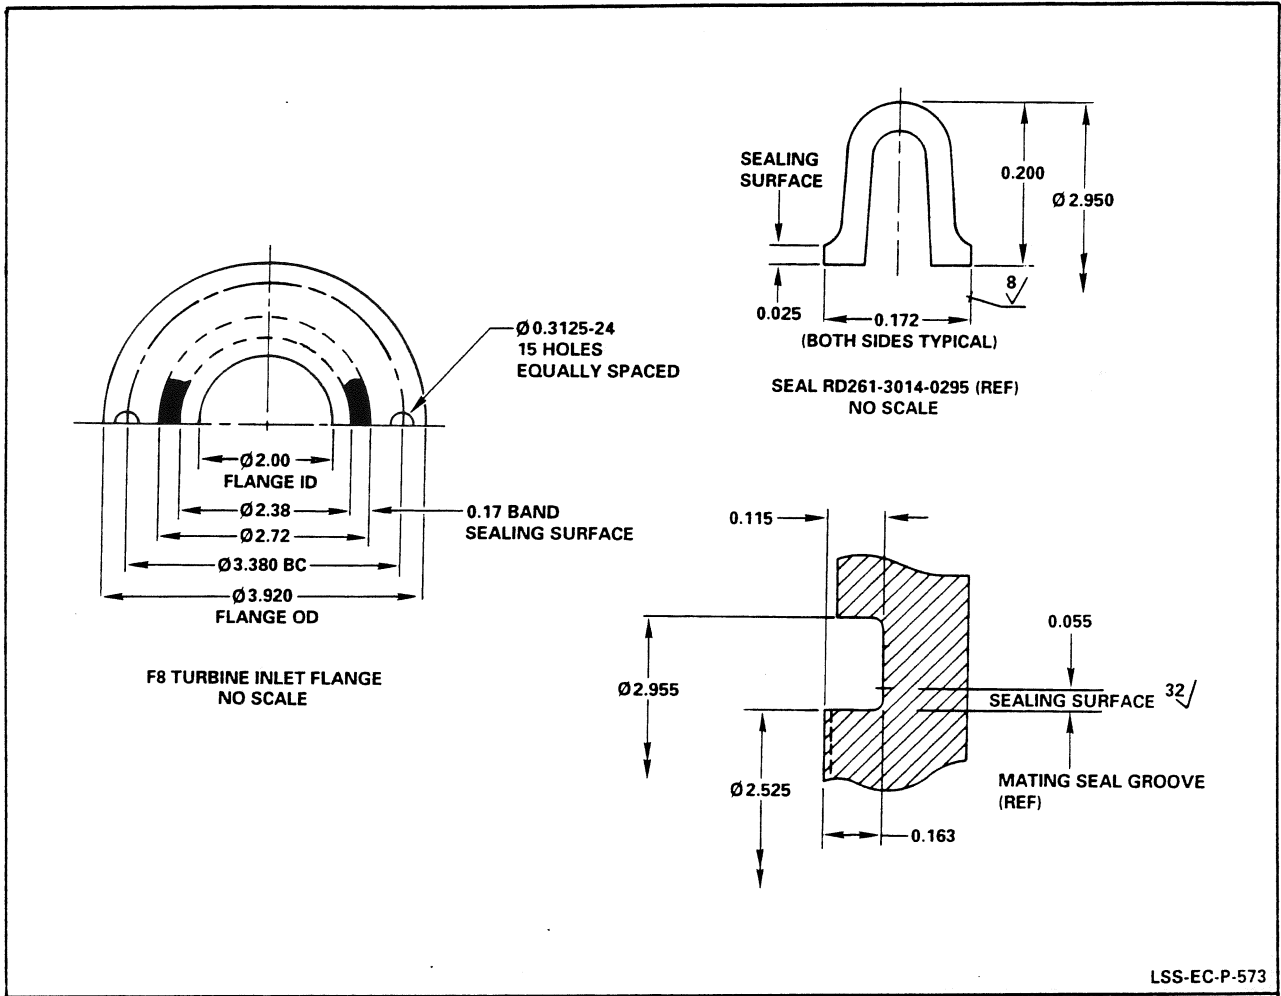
F8 Turbine Inlet Flange Sealing Surfaces
